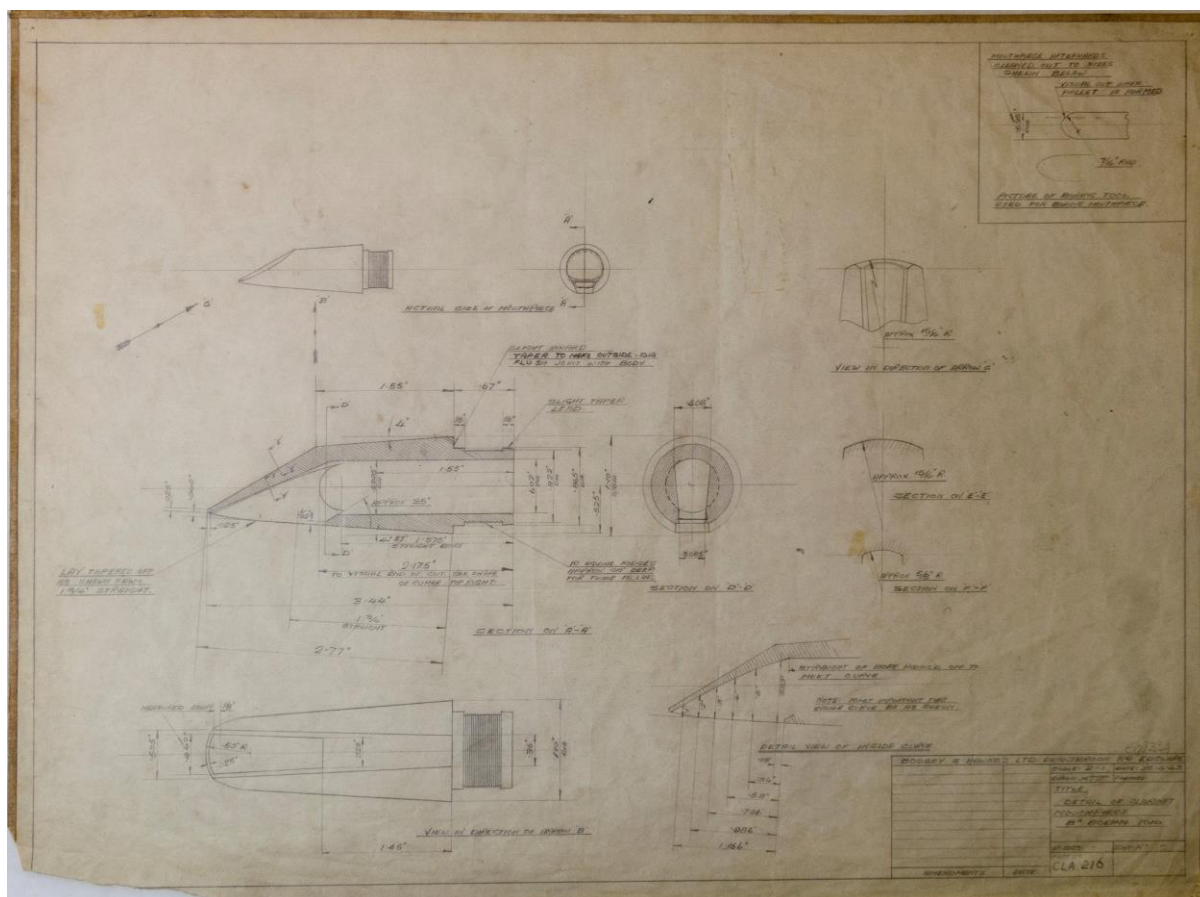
Technical drawing for 1943 Bb Boehm 1010 mouthpiece
